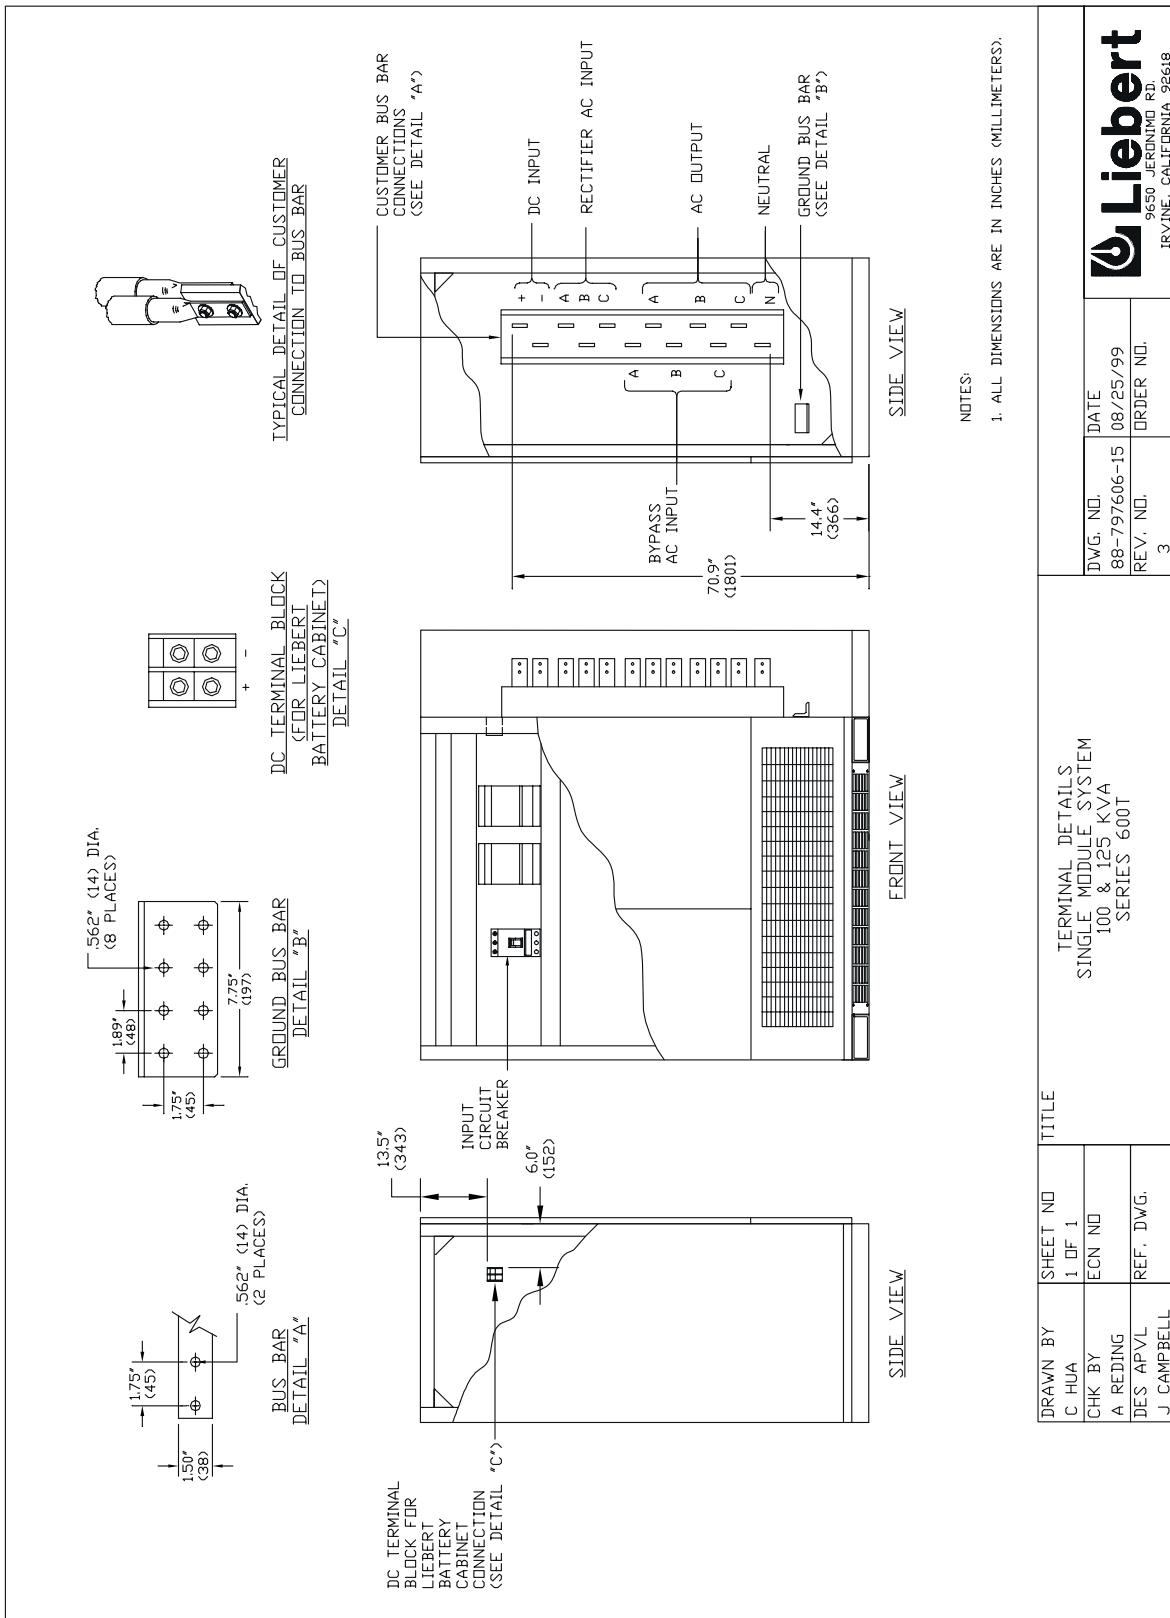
Terminal Details, 100 & 125 kVA Standard SMS
